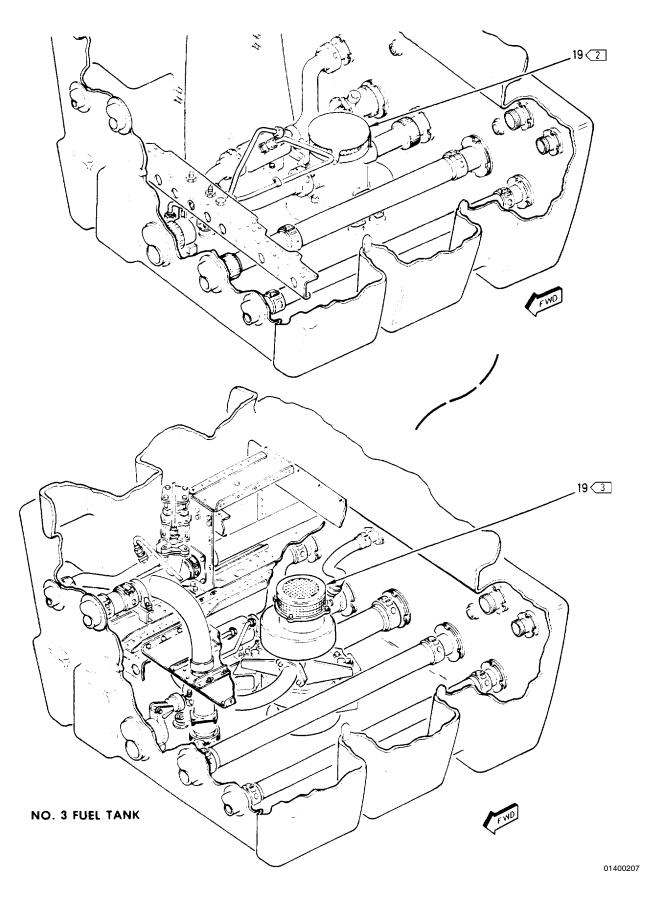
Engine Fuel Supply System Component Locator (Sheet 7)
